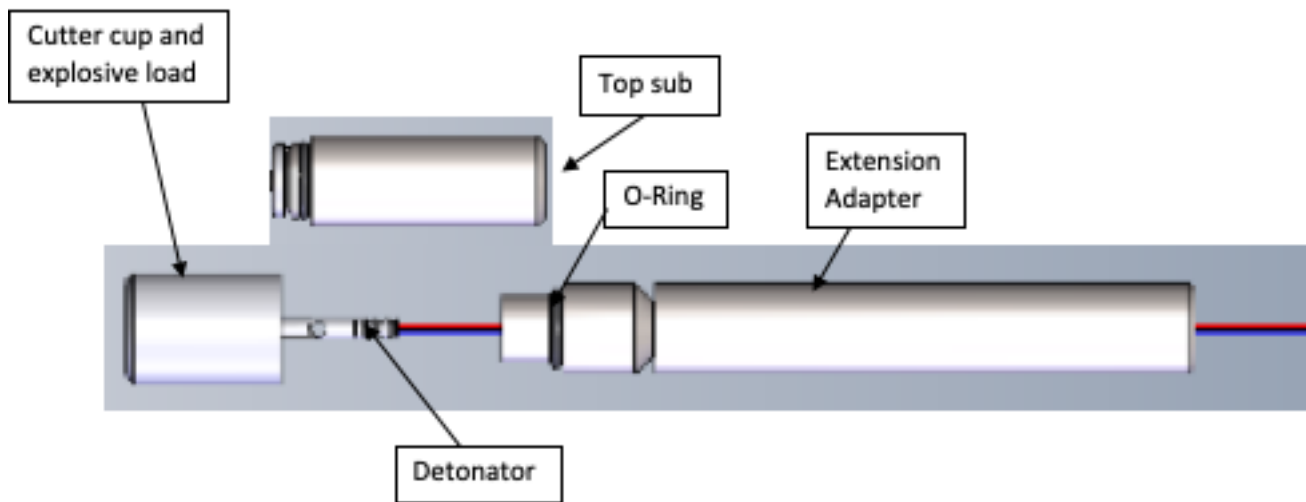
Exploded Arming View of Tubing Cutter Using DET-3050-009LS
